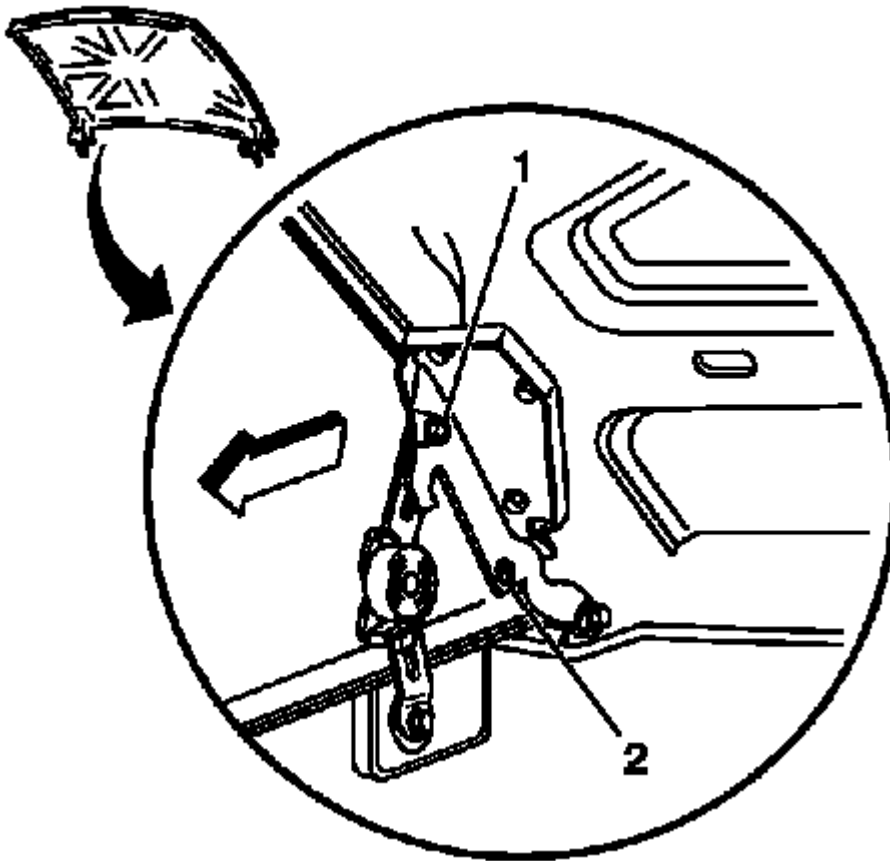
Identifying Hood Hinge Normal And Service Position Bolt Holes
